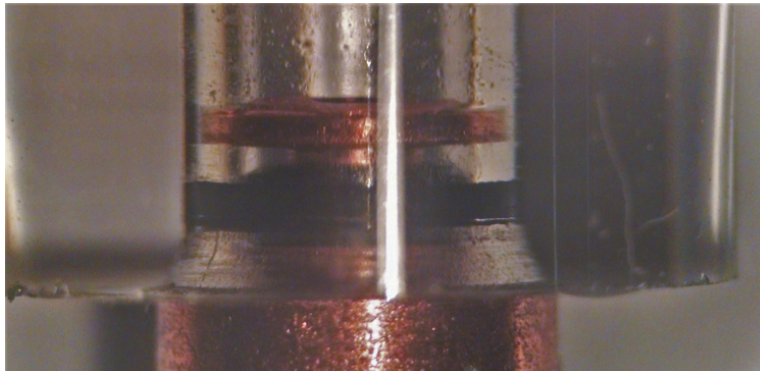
Borosilicate tube with chamfer and inserted copper plug with o-ring seal
